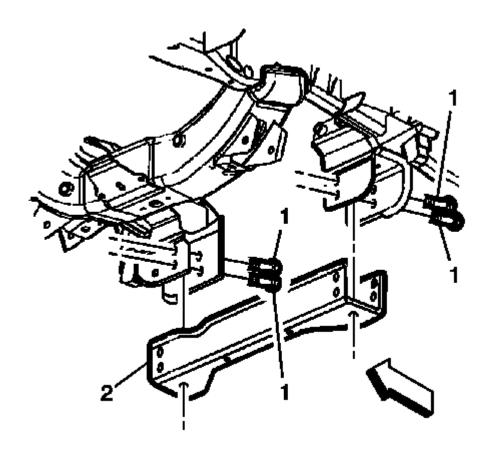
View Of Crossbar Bolts & Bar (2WD) Courtesy of GENERAL MOTORS CORP.
